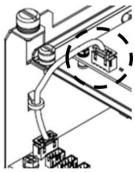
Connection of the harness plug to the Drive controller PCBA
